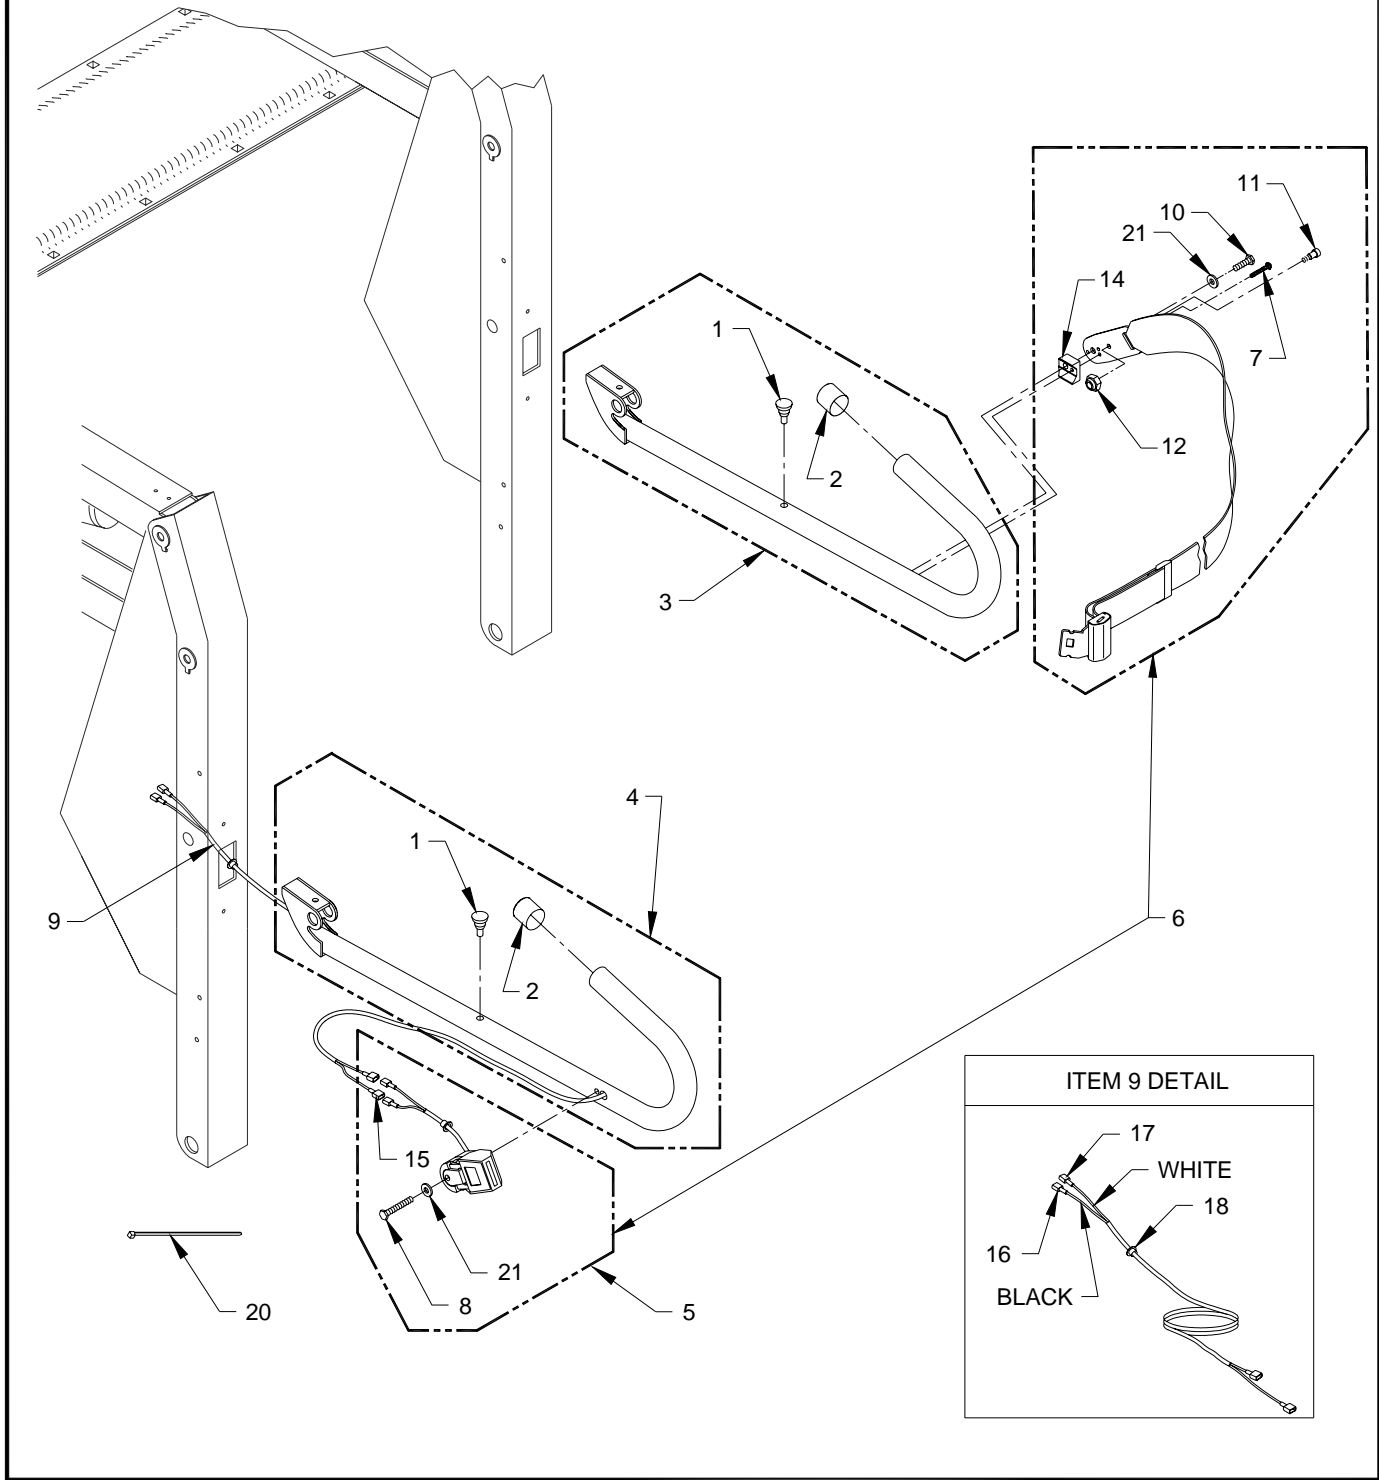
ADA HANDRAIL ASSEMBLIES
